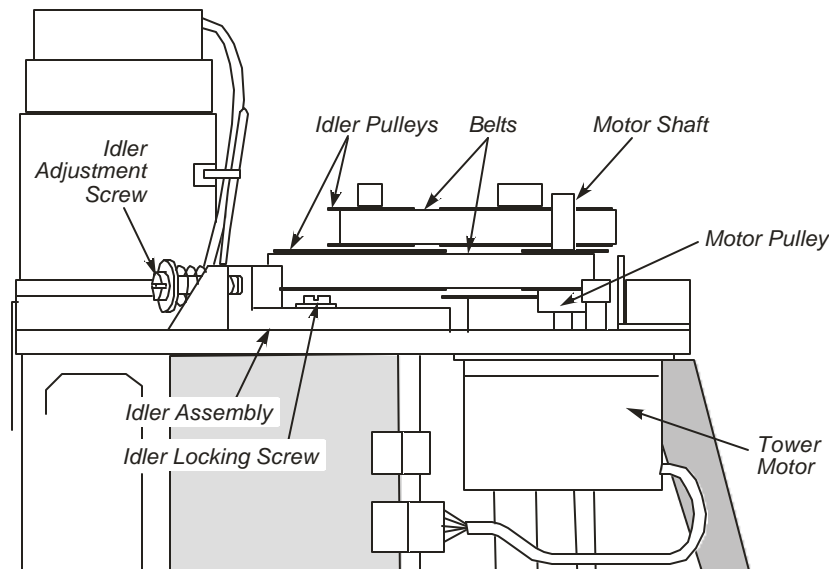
26 Location of the Tower Motor, Idle Assembly, Belts, and Pulleys.
